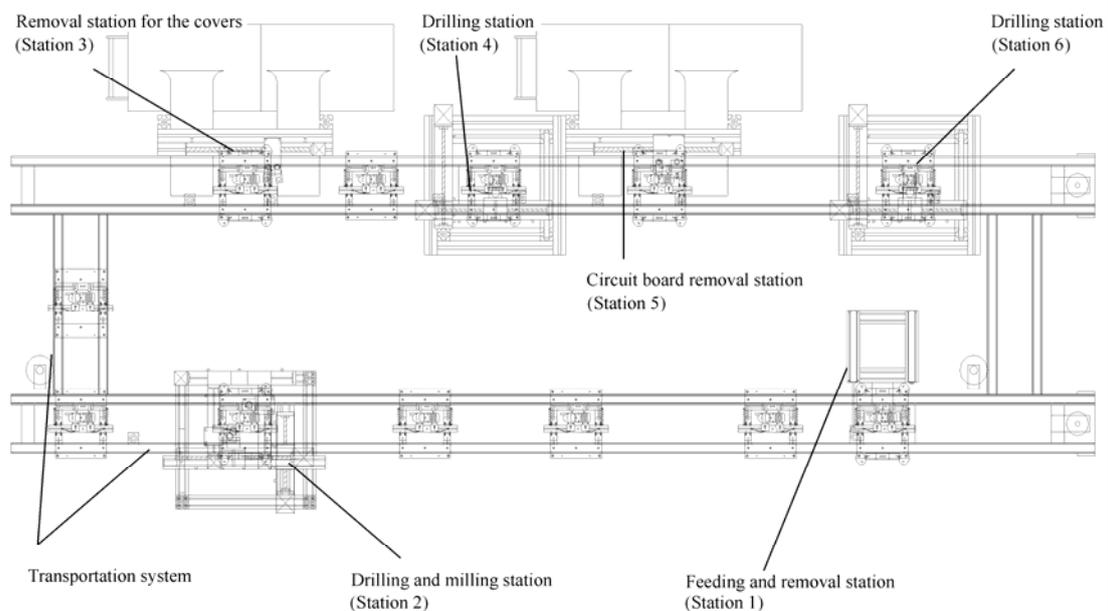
Layout of the disassembly cell (Kopacek, Kopacek, 2003)
